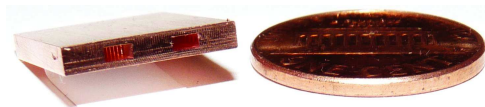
Photograph of the channel-drop filter with soldered rods. The filter is cut apart with electro-discharge machining. Solder penetration from the outside is clearly visible.
